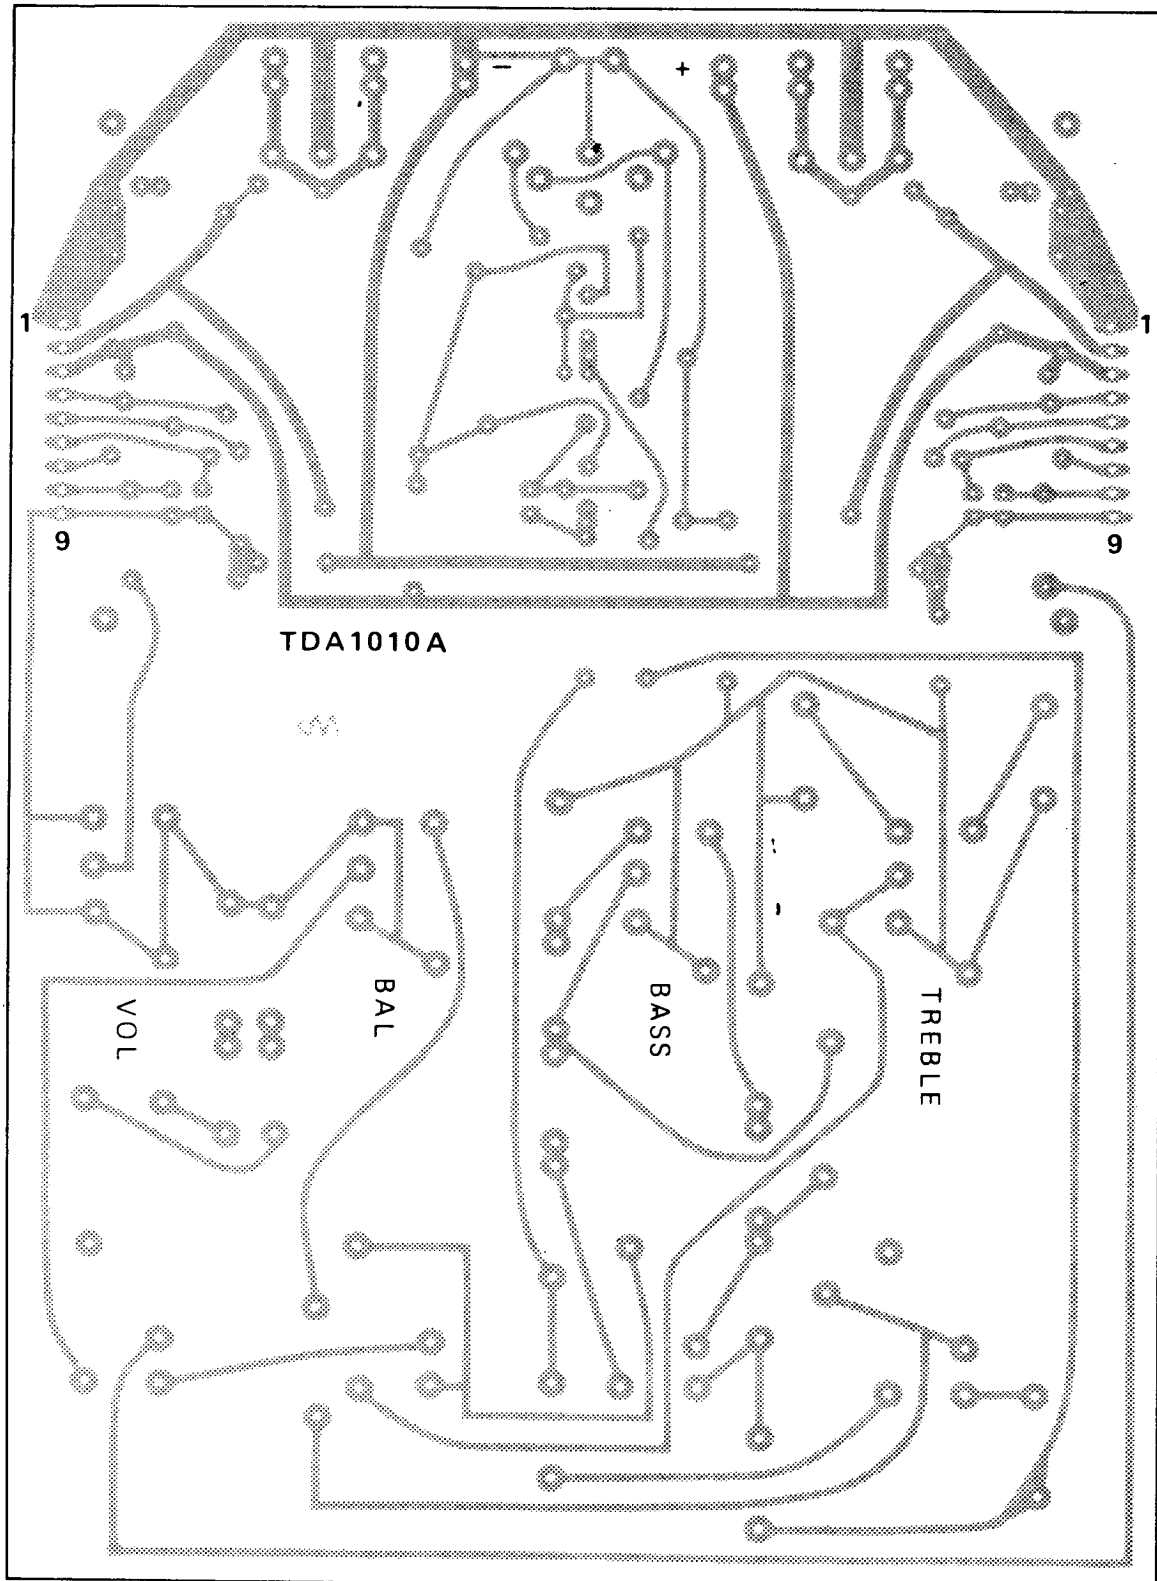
Track side of printed-circuit board used for the circuit of Fig. 17 (Fig. 16 partly); p.c. board dimensions 169 mm x 118 mm.
